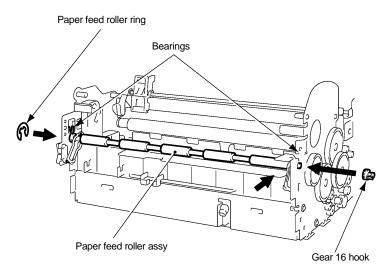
Installing the Paper Feed Roller Assy (2)
